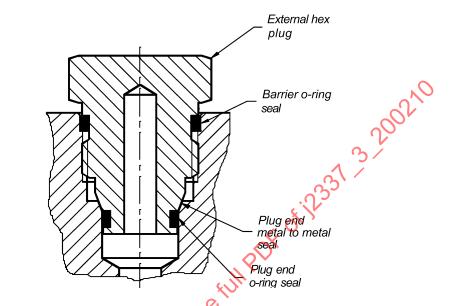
EXTERNAL HEX PLUG ASSEMBLY WITH SEALS
